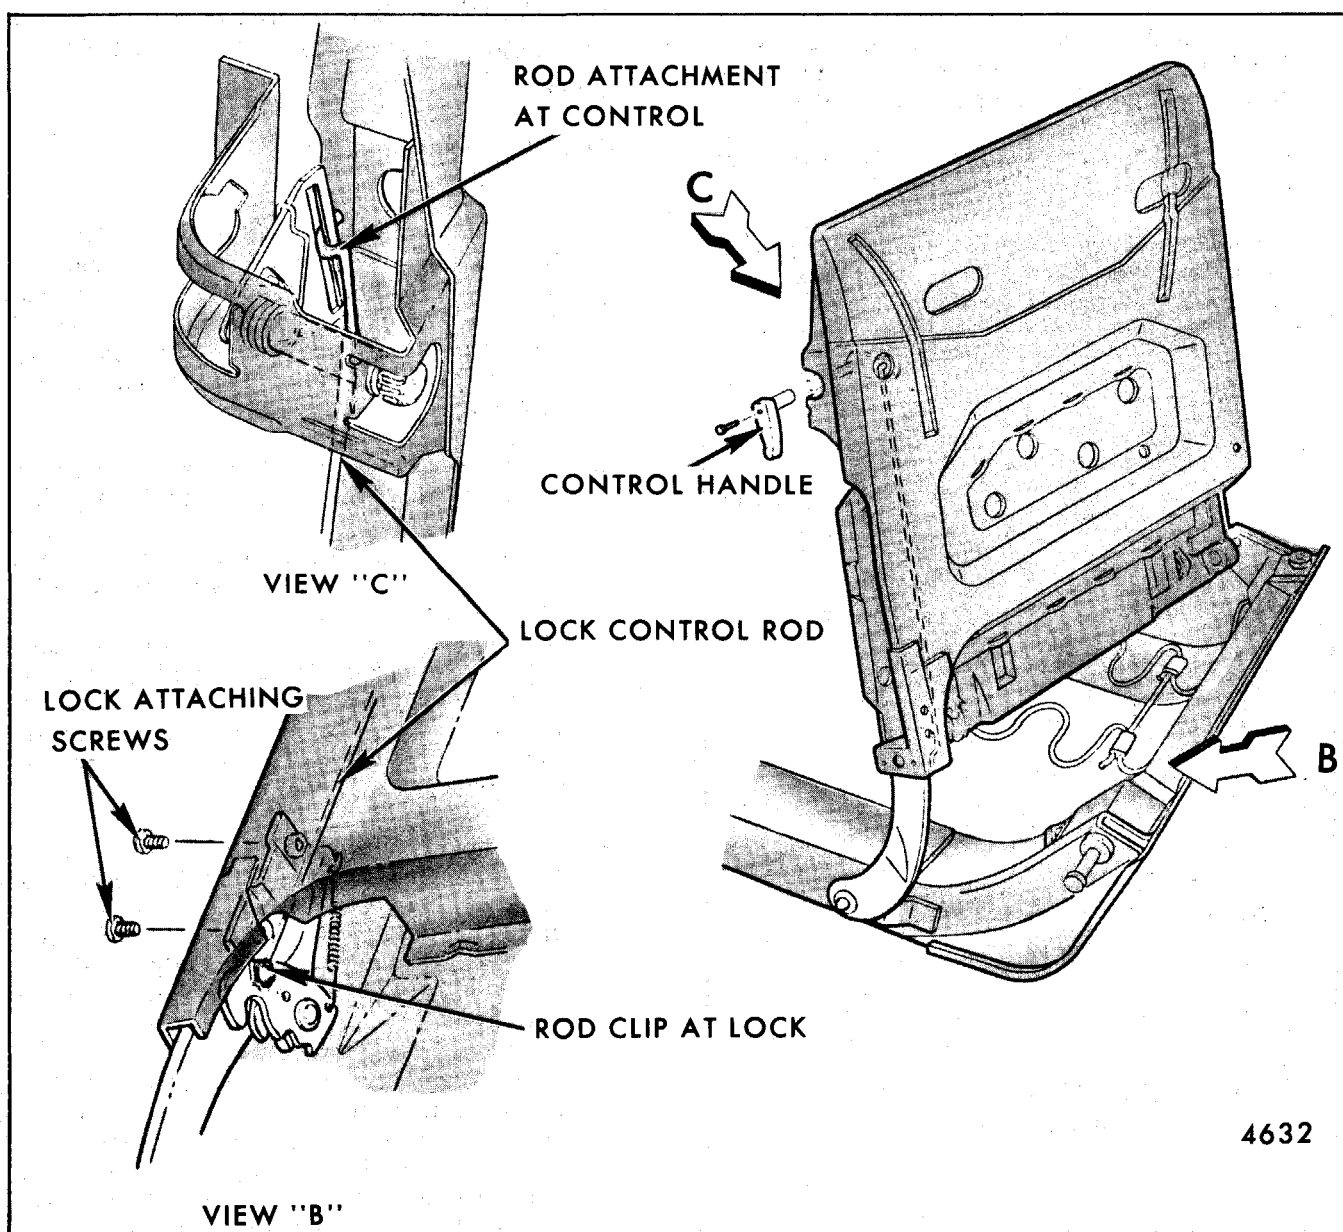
Front Seat Back Manually Operated Lock - Oldsmobile "E" Body Styles with Full Width or 60-40 Seats and Chevrolet Monte Carlo with 50-50 Seats
